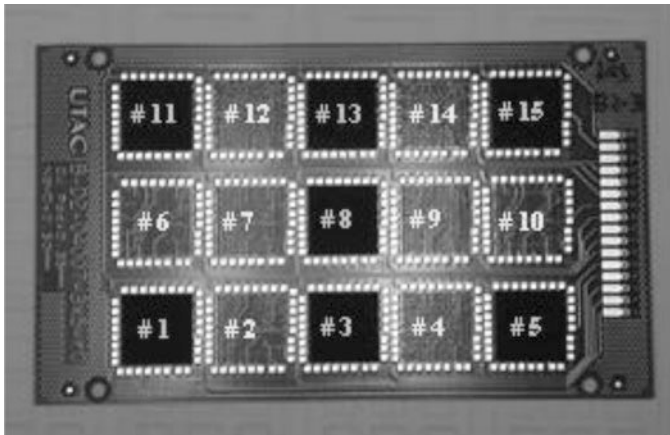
PCB test board (77 × 132mm) with 15 × 15mm FPBGA packages
